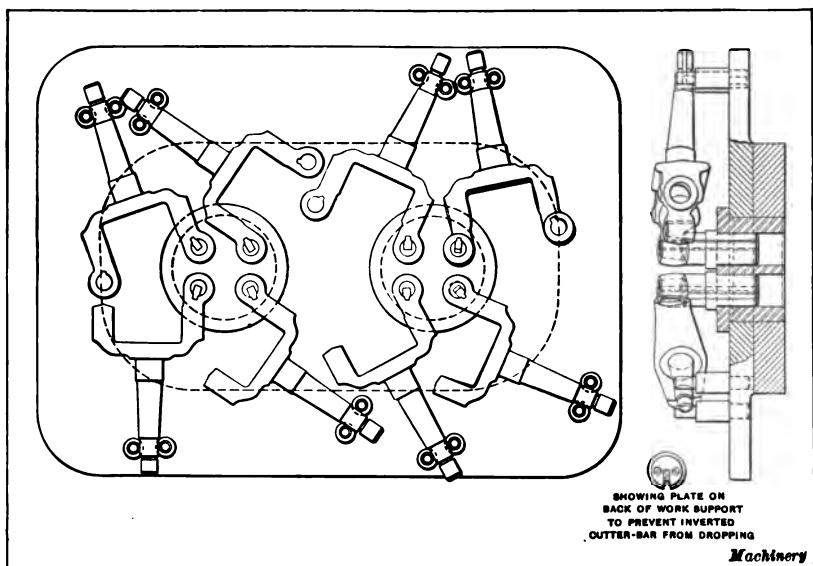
Fixture for supporting Steering Knuckles while broaching Keyways
